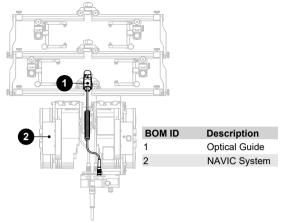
Optical Guide mounted to a pivoting probe holder frame
